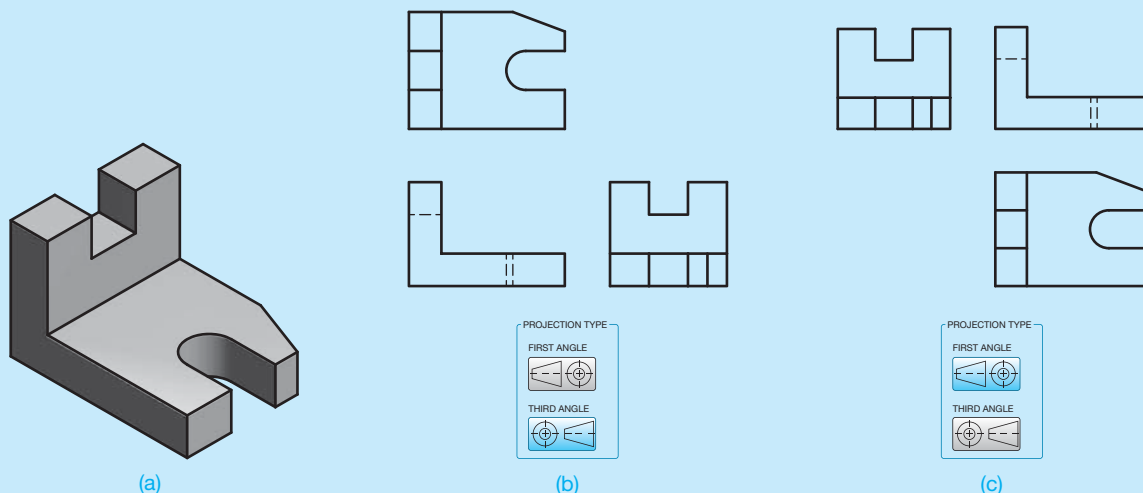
(a) The solid model provides all of the geometry needed to prepare a multiview drawing. (b) Using a separate drawing file and third-angle projection to extract multiviews. (c) Using a separate drawing file and first-angle projection to extract multiviews.
